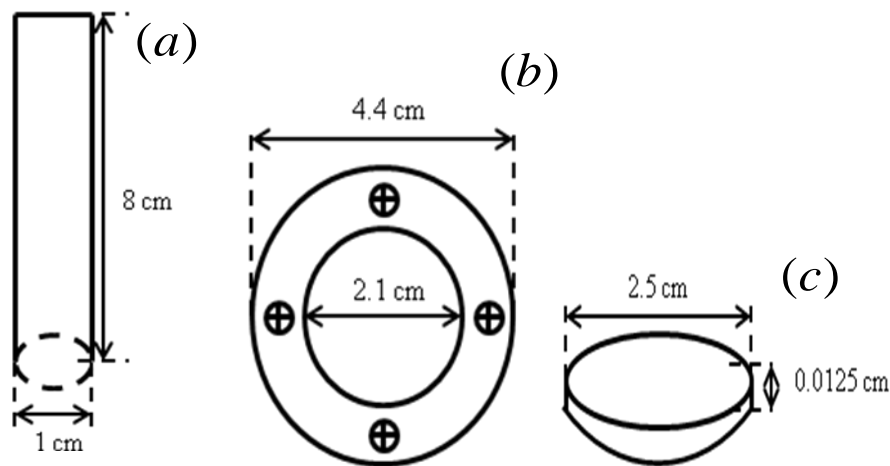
Schematic representation of the adjoining tools: (a) metal probe; (b) annular support and (c) carbon tape.
